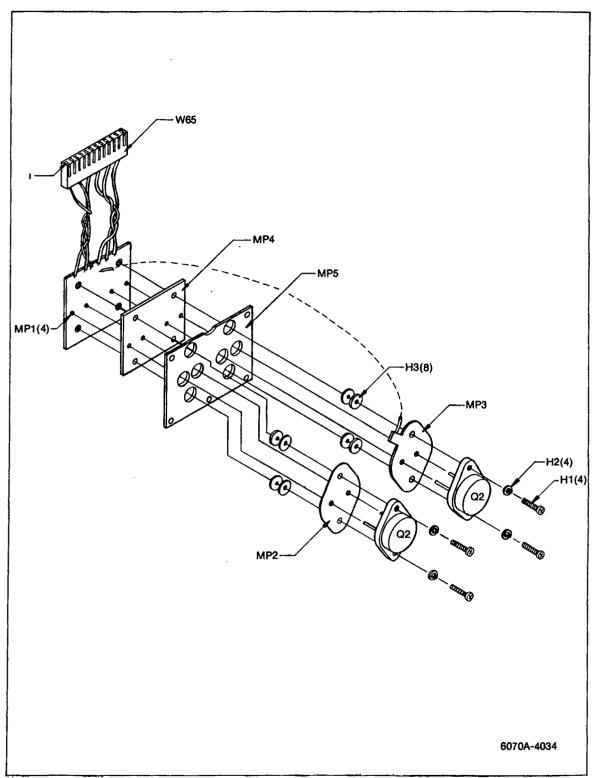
A5A5 Switching Transistors Assembly (cont)
